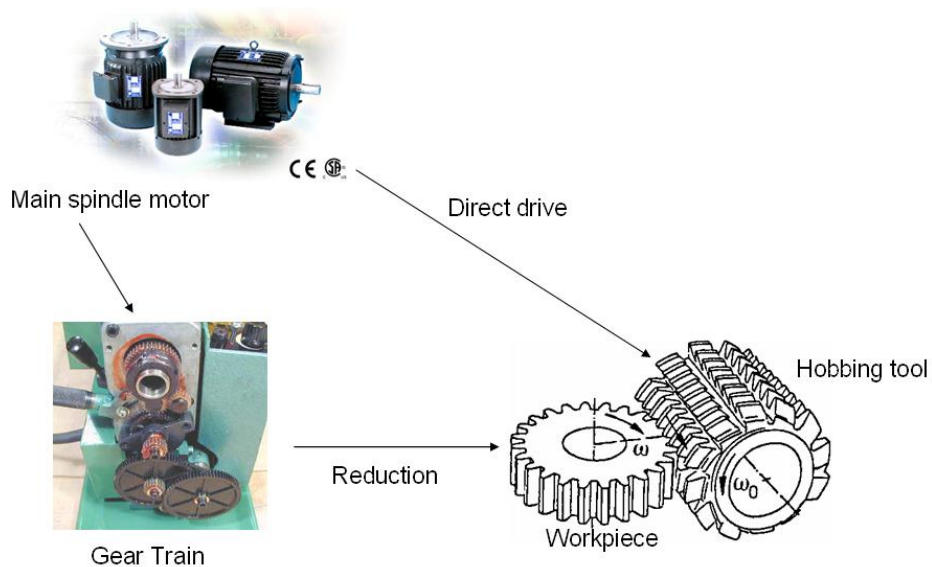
Working principle of a traditional gear hobbing machine [30][31]
